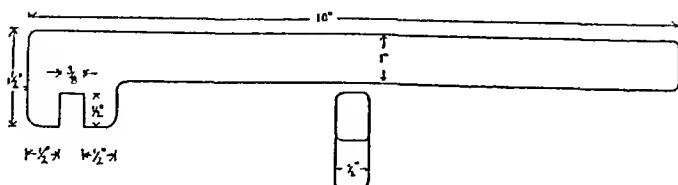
Steel bending tool for rods and bars of all splints used in this scale.
